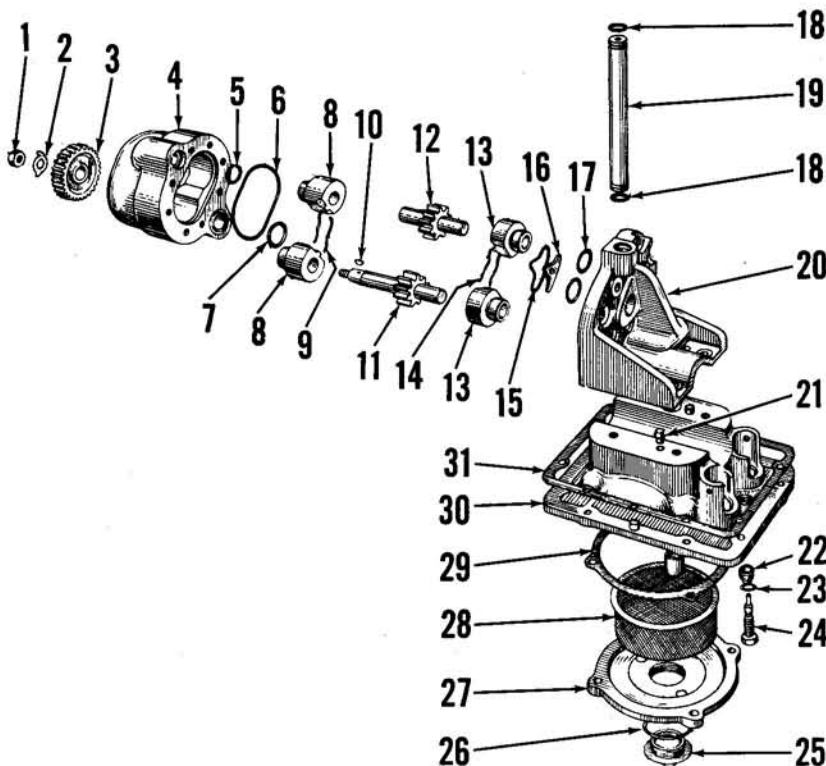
Exploded view of model "FMD" hydraulic pump assembly. Pump is no longer available as a complete assembly; thus, some "FMD" or "FPM" tractors may be fitted with later type pump as shown in Fig. 216.
